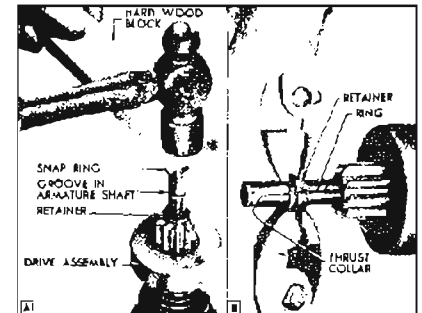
Pinion Stop Retainer and Snap Ring Installation
